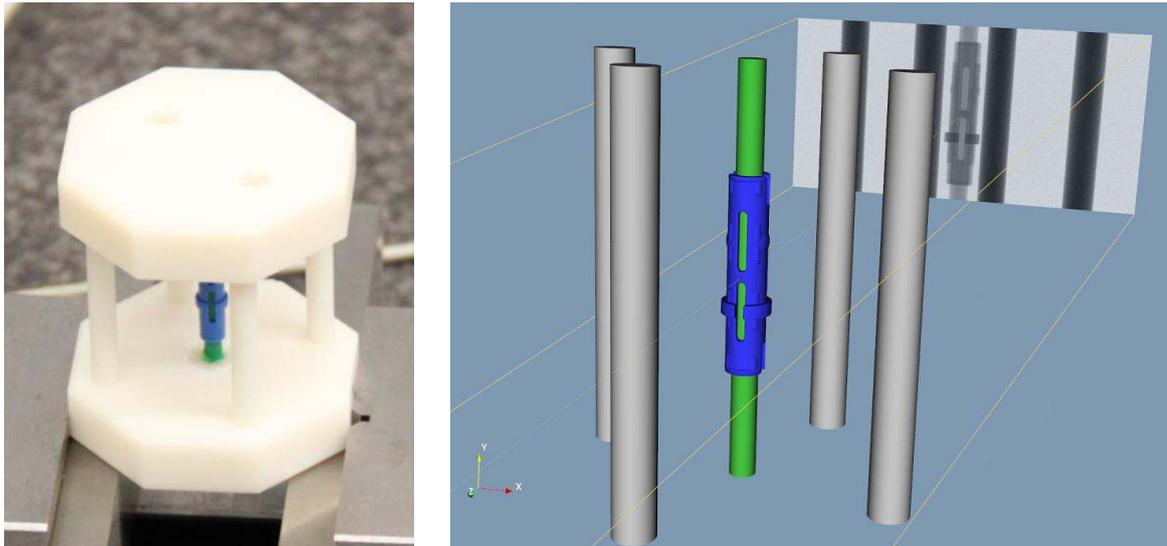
LEGO connector including fixture. The 3D-printed fixture is designed to protect the calibrated connector from damage while still allowing tactile and optical measurements. The right side shows the aRTist scene of the simulation.
